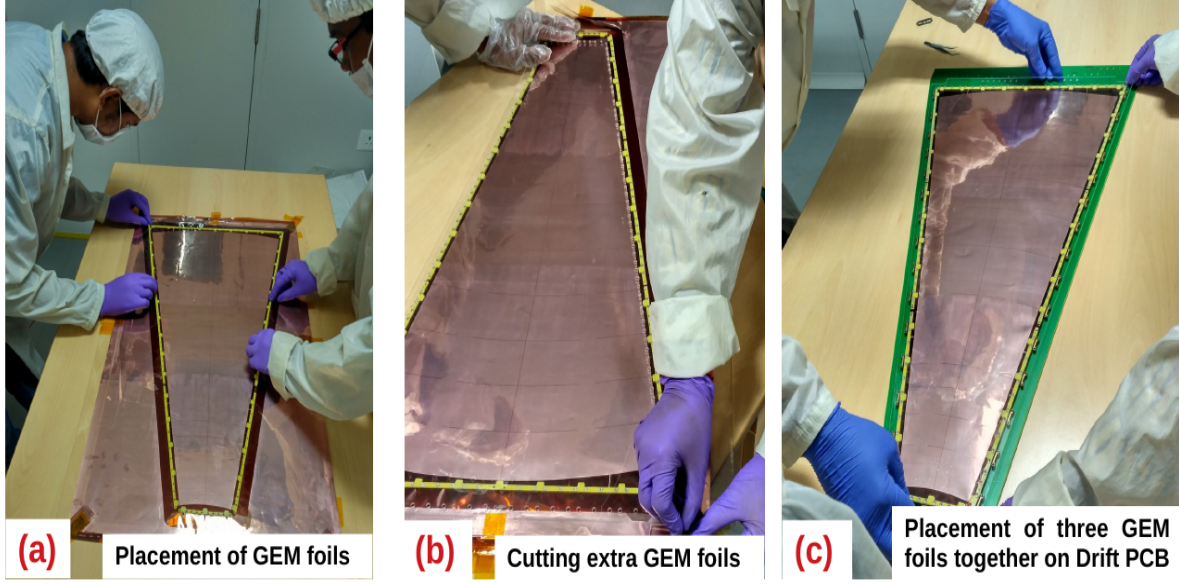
a) Placement of GEM foils and spacers. b) Cutting extra foil. c) Placement of three stack of GEM foils inside drift PCB for stretching and final assembly
